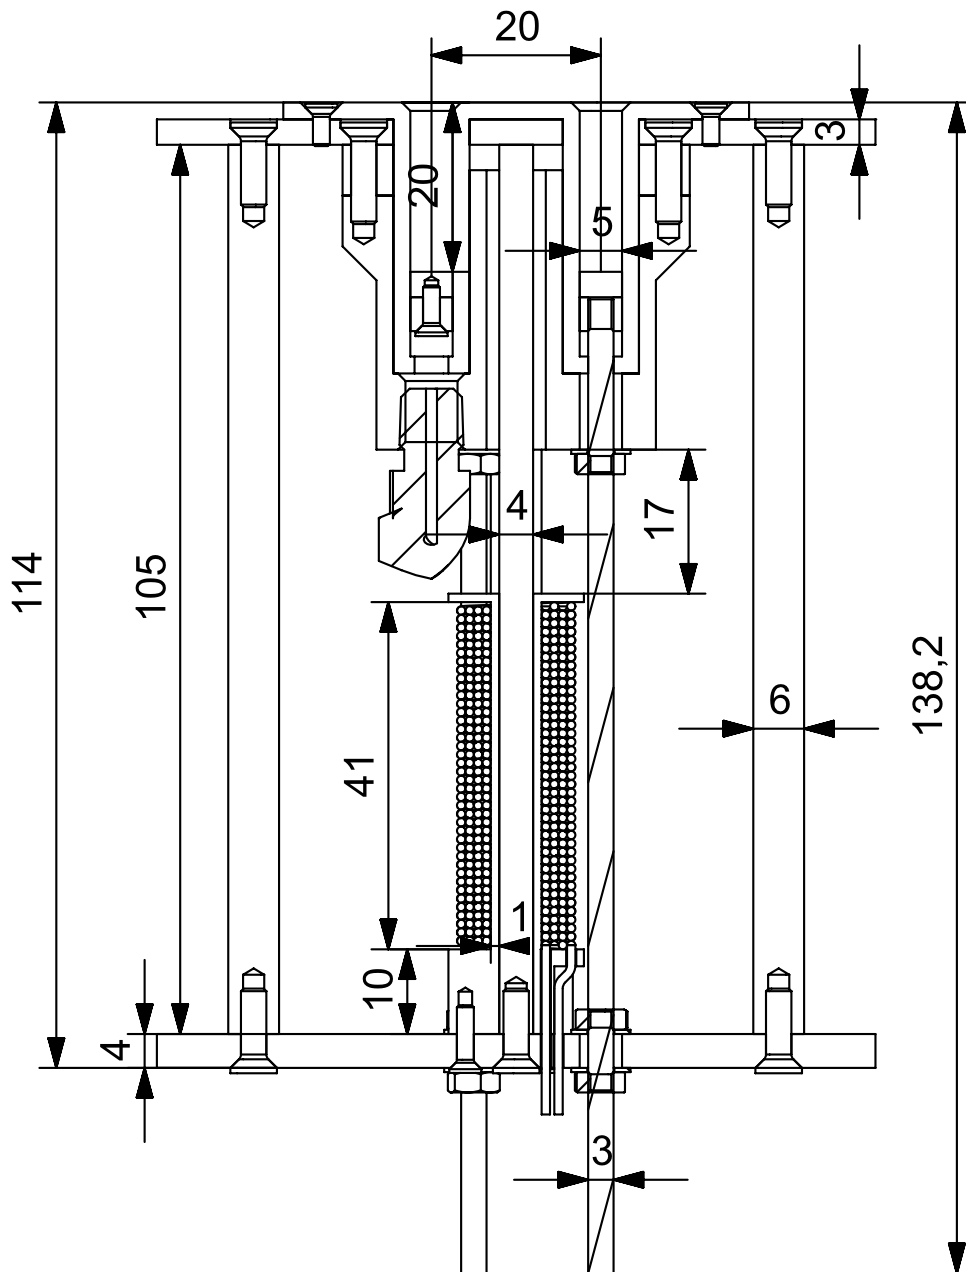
Technical drawing of the assembled Hall Thruster in a diagonal cross section
